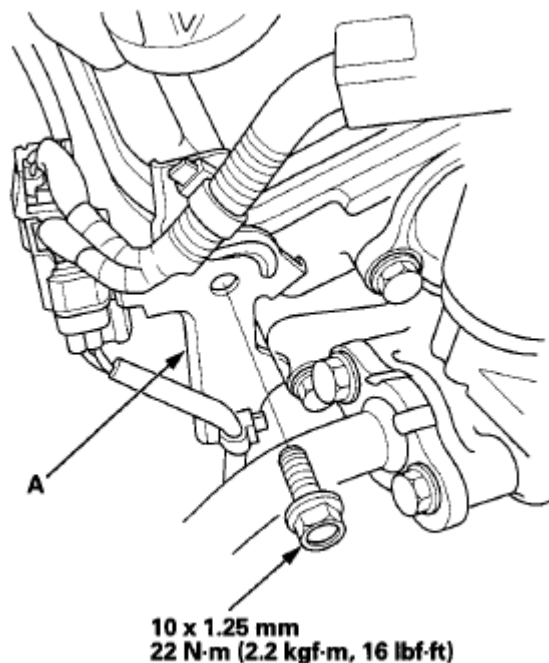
Installing Connector Bracket To Front Cylinder Head With Torque Specifications
